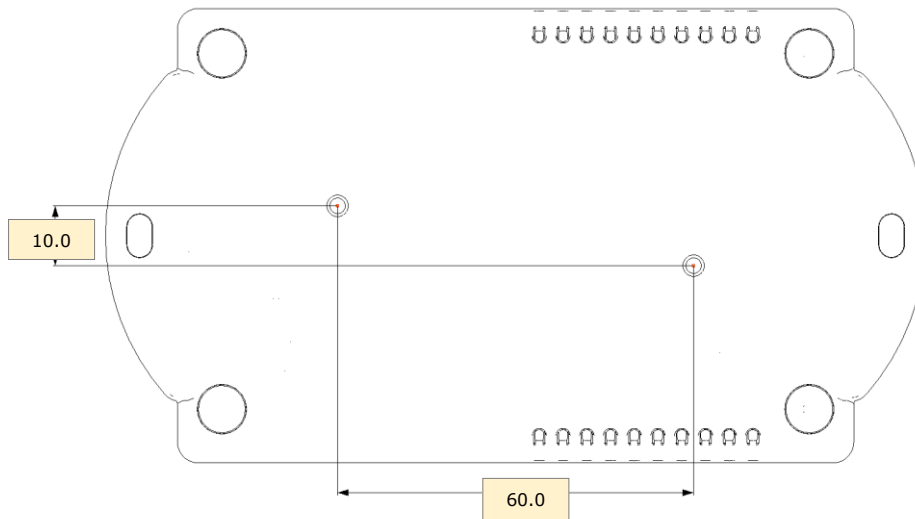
LDSBus 2CH NL Relay Dimension - Bottom View
